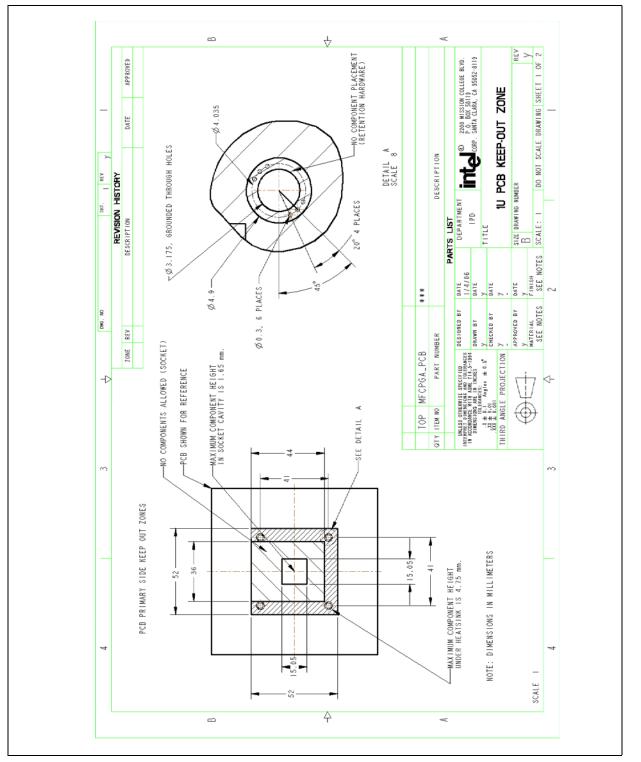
1U Reference Heatsink PCB Keep Out Requirements (Sheet 1 of 2)
